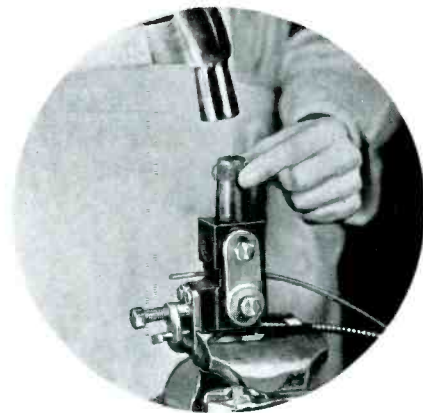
Pressure for swaging and cutting with the Star tool is applied through sharp raps of a hammer.
